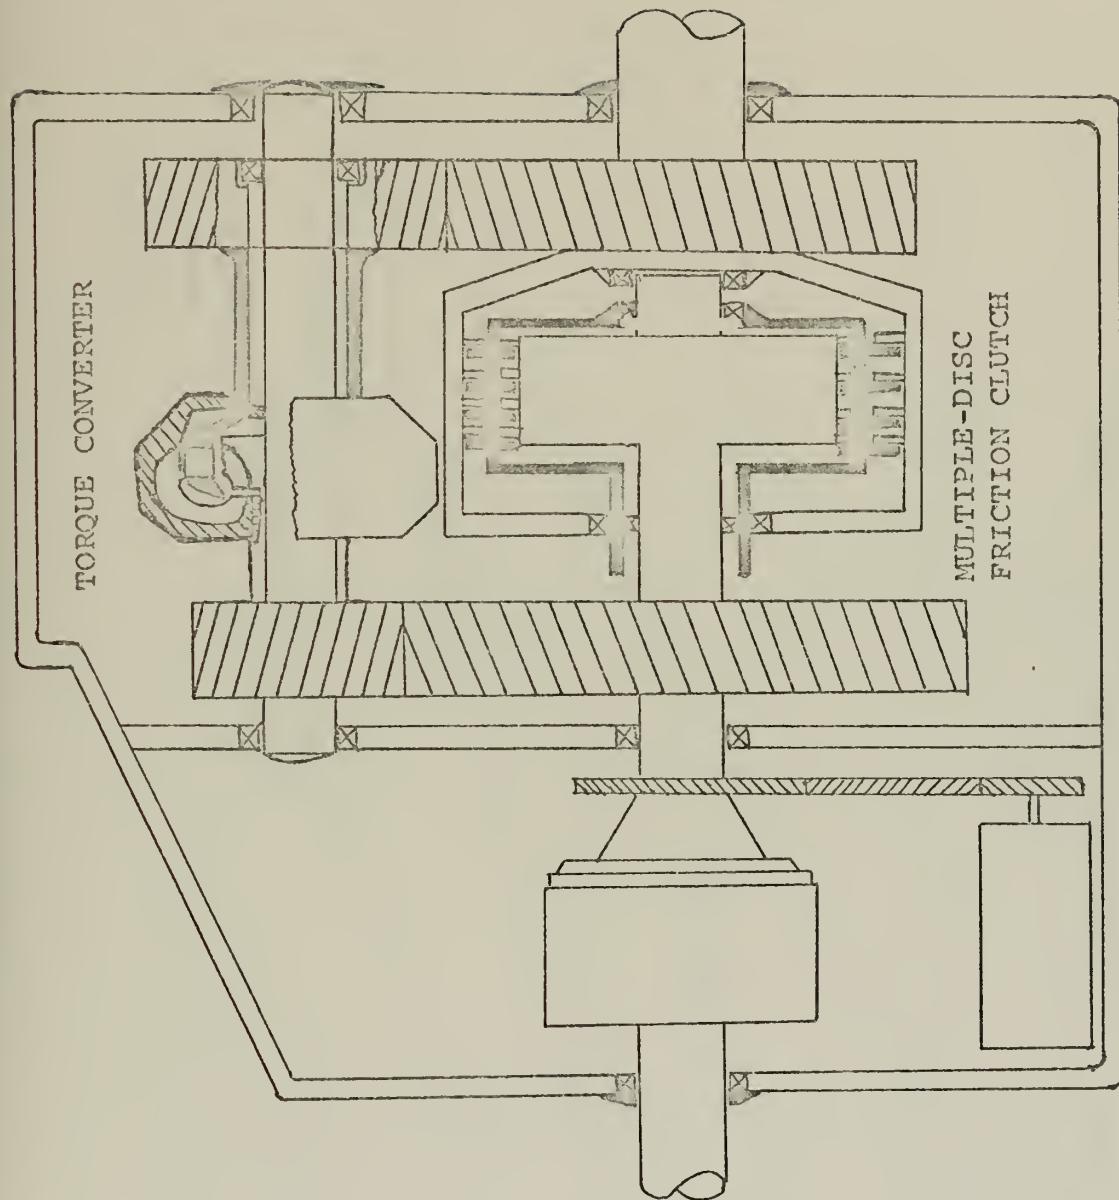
REVERSING GEAR WITH TORQUE CONVERTER (9)
